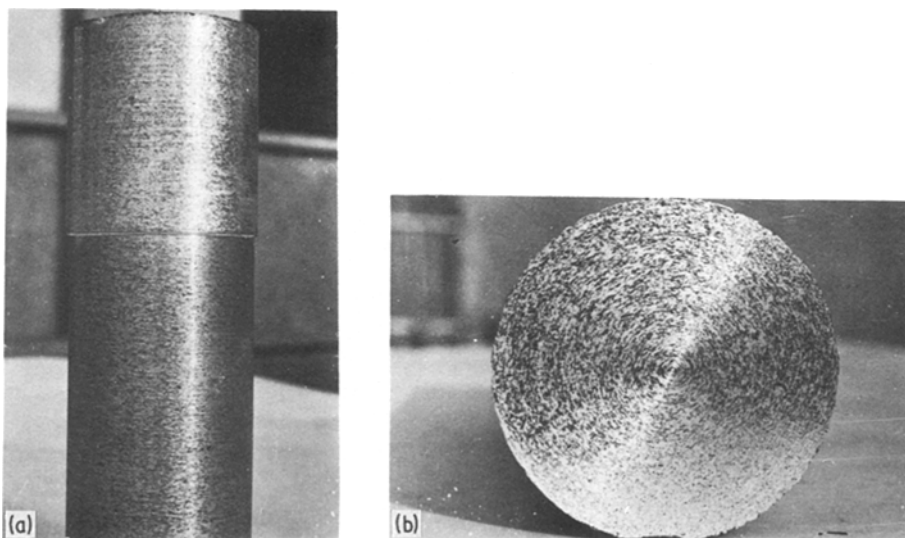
Photographs of a machined surface of LM-6-20 wt % sand composite casting: (a) longitudinal view, (b) cross-section.
